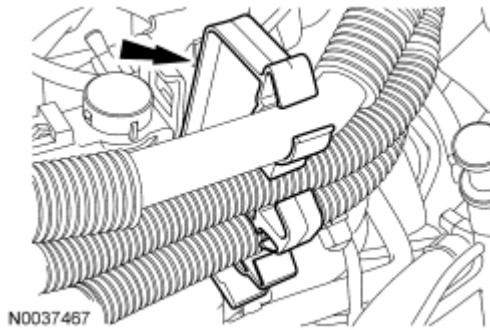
Locating Evaporative Emissions (EVAP) Tube Bundle Retaining Clip
